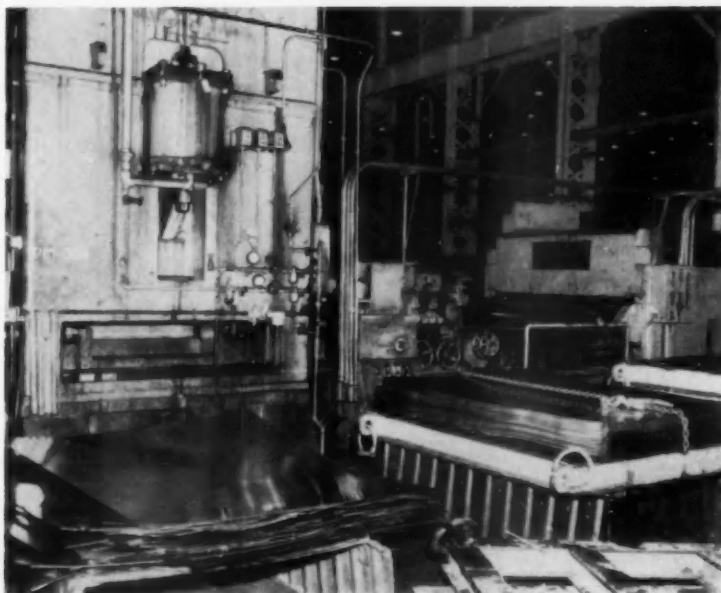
McKay equipment is employed to uncoil stock 72 in. wide, oil and level it and feed it to the Verson blanking press shown here. Blanks for inner and outer hood panels are the same and are stacked on pallets for transfer by crane to processing lines
